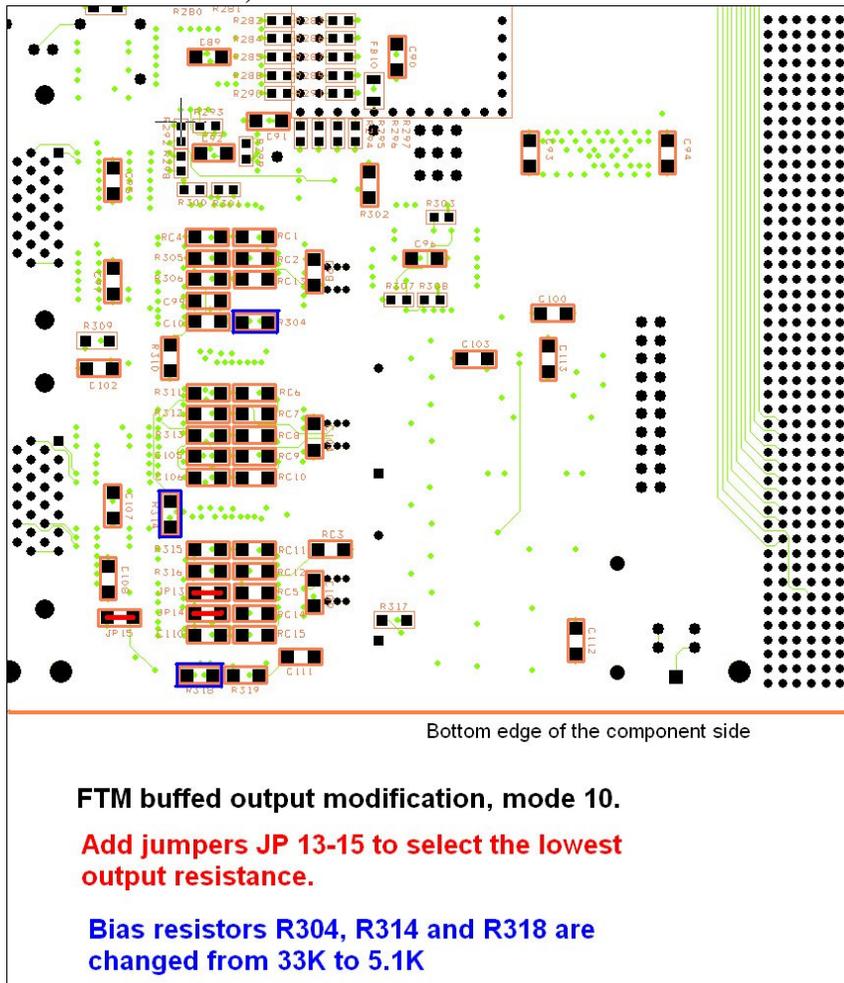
schematic of the FTM board with in BLUE the resistors to be replaced and in RED the JUMPERS to be inserted.
